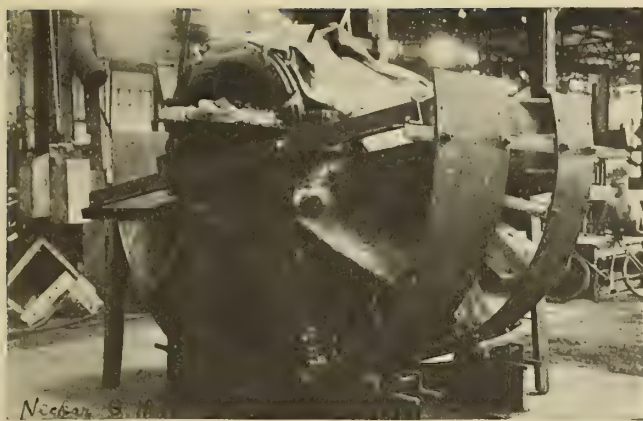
Acetylene Weld on Neckar Cylinder Partly Made. Note Mounting to Keep Puddled Metal Horizontal
